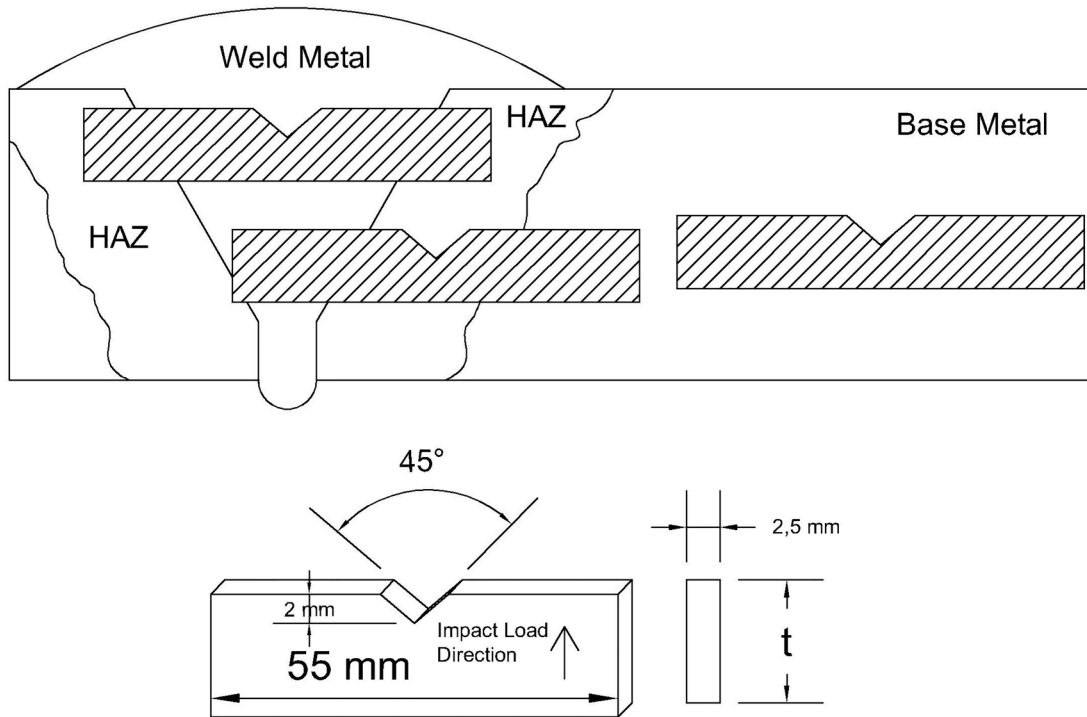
Dimensions of impact test specimens and notch locations acc. to the standard
